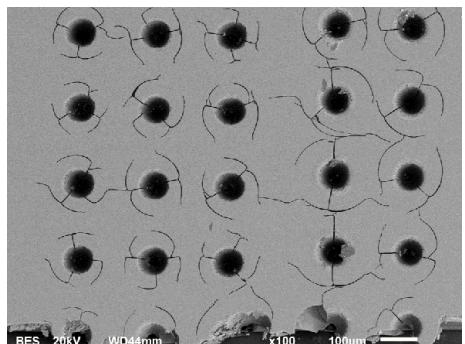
Observable cracking of glass during small diameter hole drilling (Courtesy of LPKF).
